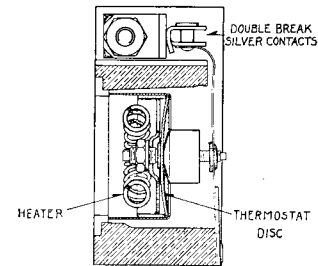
SECTIONAL VIEW TYPE MW OVERLOAD RELAY WITH RESET ROD REMOVED
